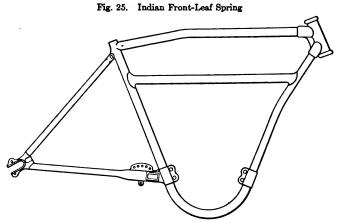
Loop Frame Showing Lugs for Motor Attachment
